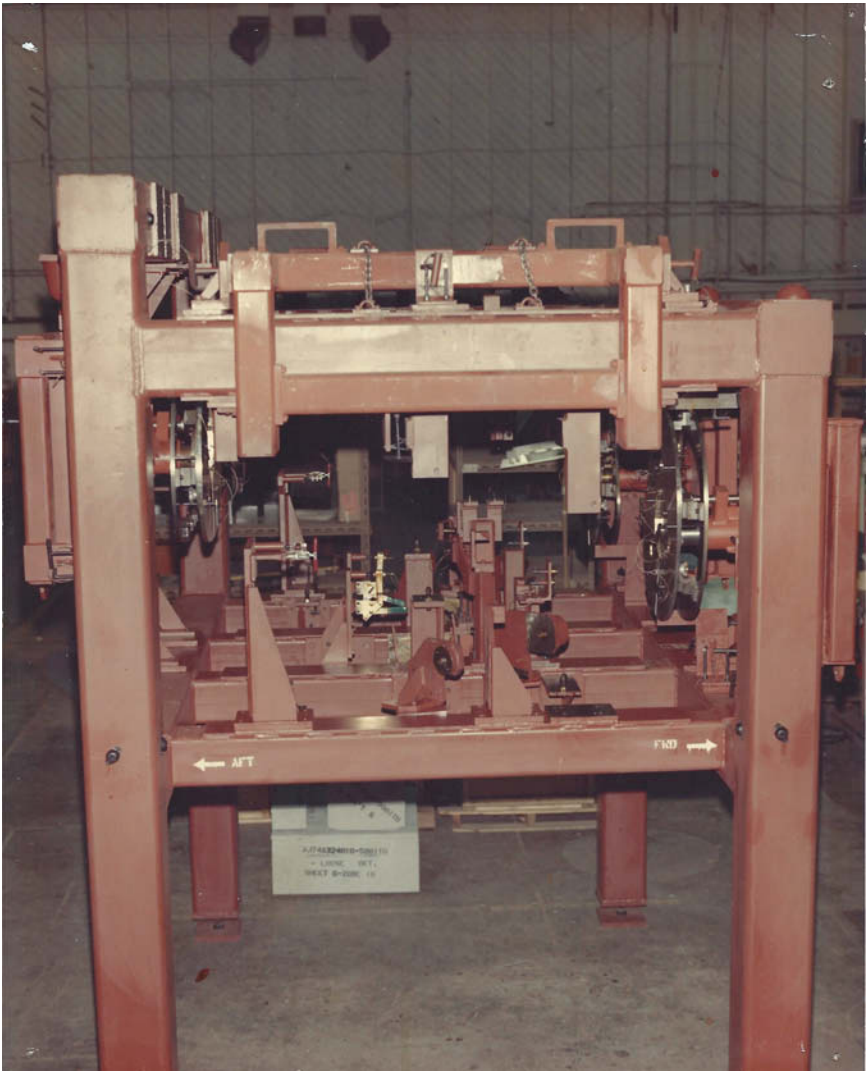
Typical small subassembly fixture of the 1970s with removable positioning details.
